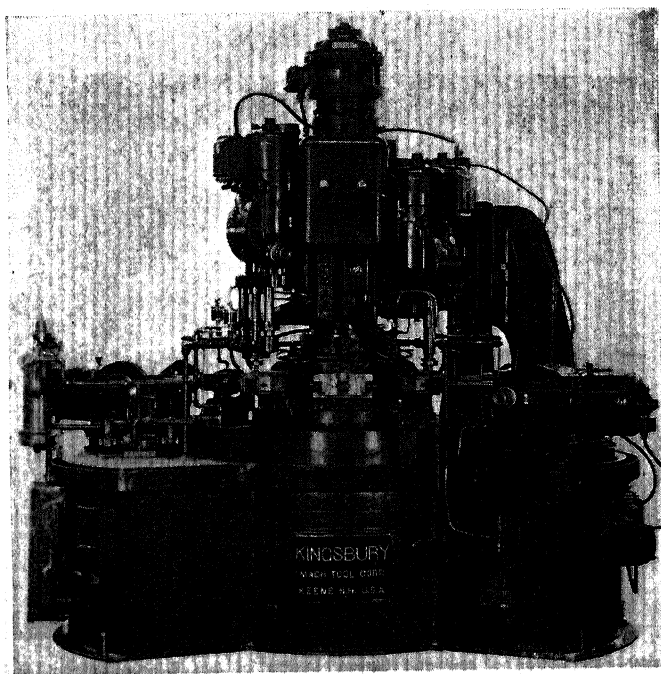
Welded steel base of this center column automatic indexing, drilling, reaming and threading machine is an interesting design.
